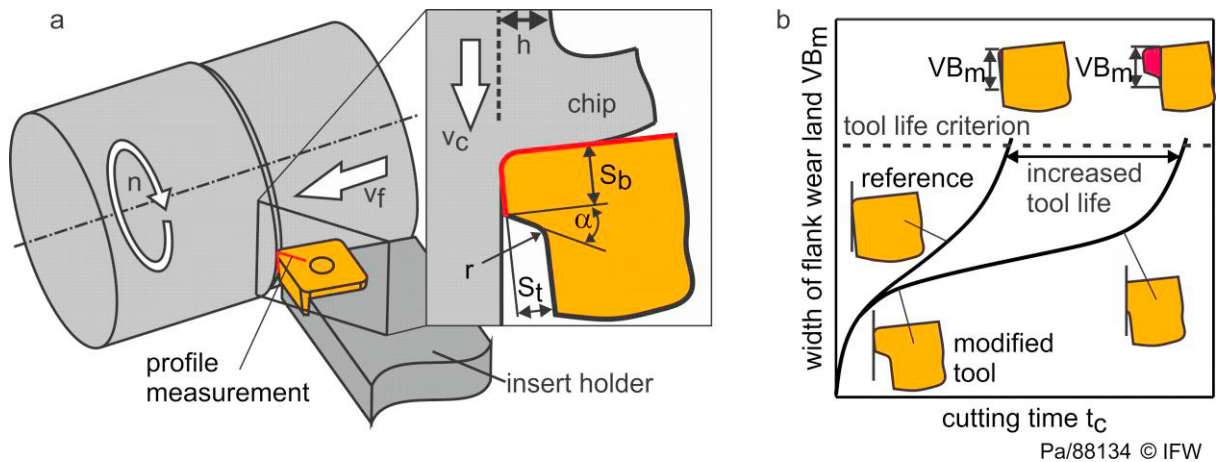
(a) Geometry of modified tools; (b) effect of flank face modifications.
